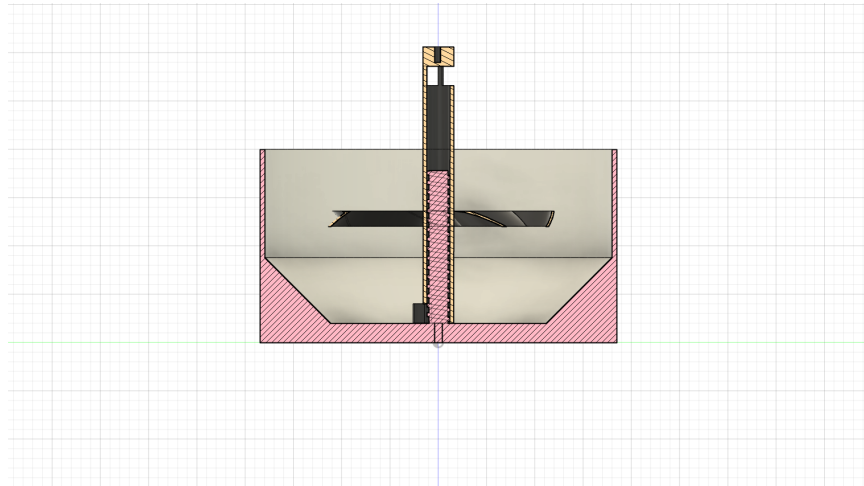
The primary internals of the pumping element. The external bulk housing and internal static screw can be seen in pink. Surrounding the internal screw is the rotary screw housing in yellow. Jutting out from the rotary screw housing in black is the toroidal impellor/agitator. The importance of the agitator cannot be over stressed. The agitator both breaks down force chains before they can fully propagate as well as assists in keeping the pump inlet saturated by shaping and directing powder flow.
